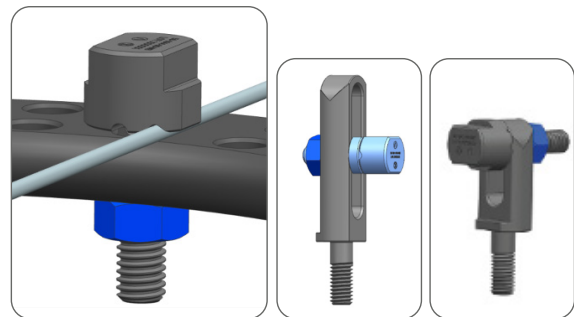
Assemble Wire to Side Load Wire Clamp on the Ring, or assemble Wire to Standard Wire Clamp or Side Load Wire Clamp on the Advanced Clamp Post
